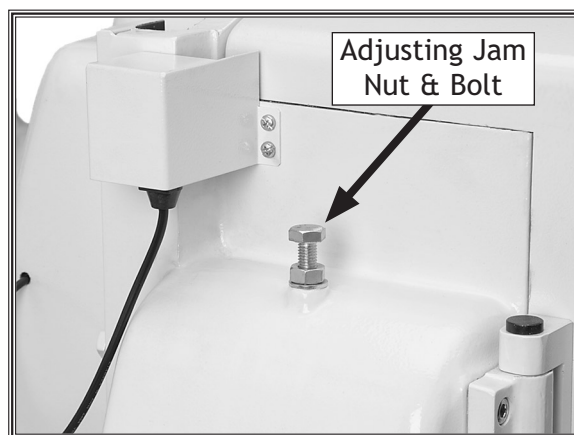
Large pressure roller adjusting jam nut and hex bolt (rear adjusting fasteners shown).
